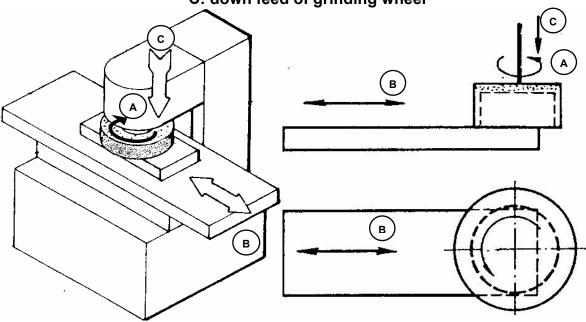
Vertical spindle reciprocating table surface grinder
